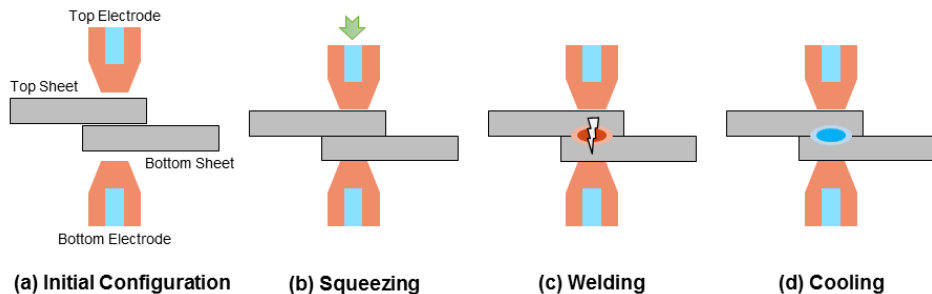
Resistance spot welding process (a) Initial configuration, (b) Squeezing, (c) Welding, and (d) Cooling.
